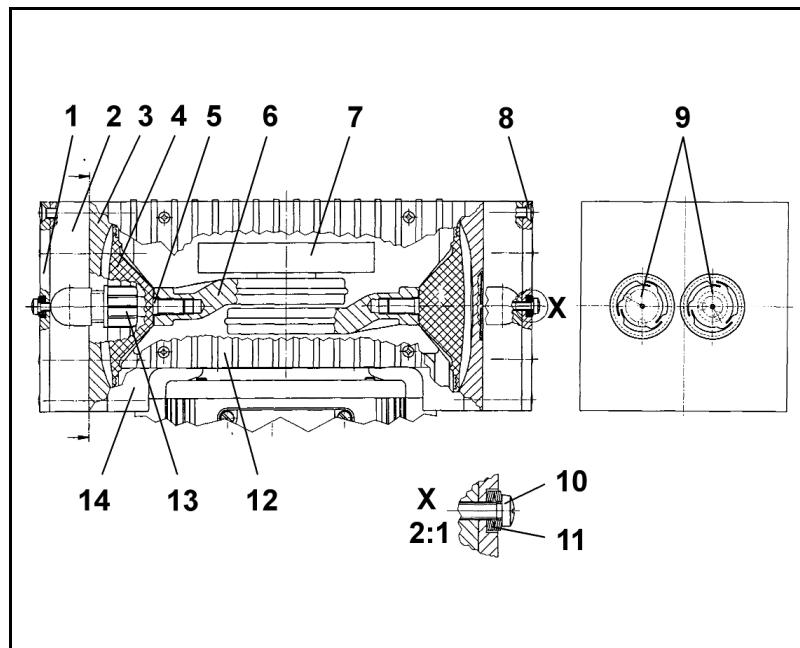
Cross chapter of the pump (symbolic) (for vacuum system SBC 860 and SBC 860.40)
